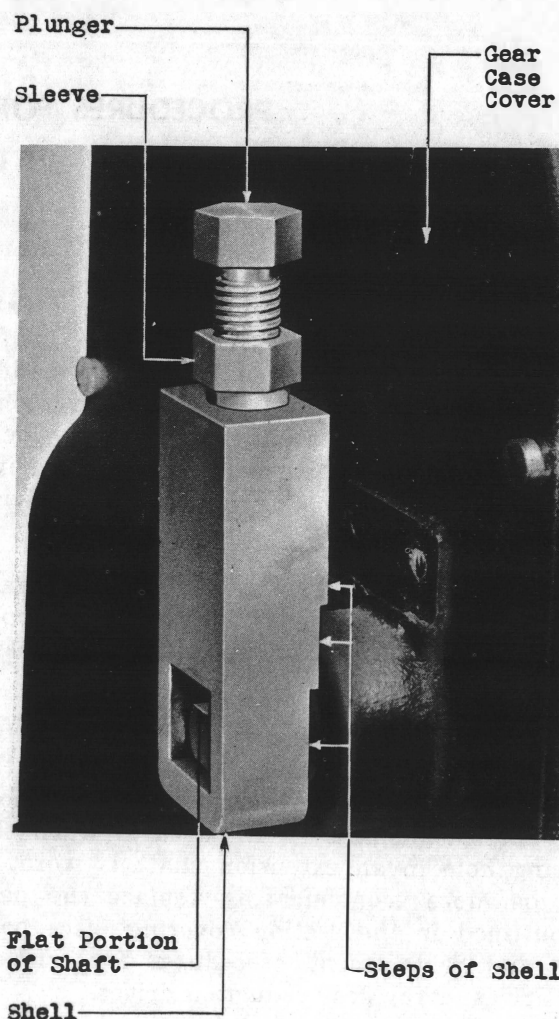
Illustrating Mounting of No. 499A Drill Jig On Friction Roll Shaft
